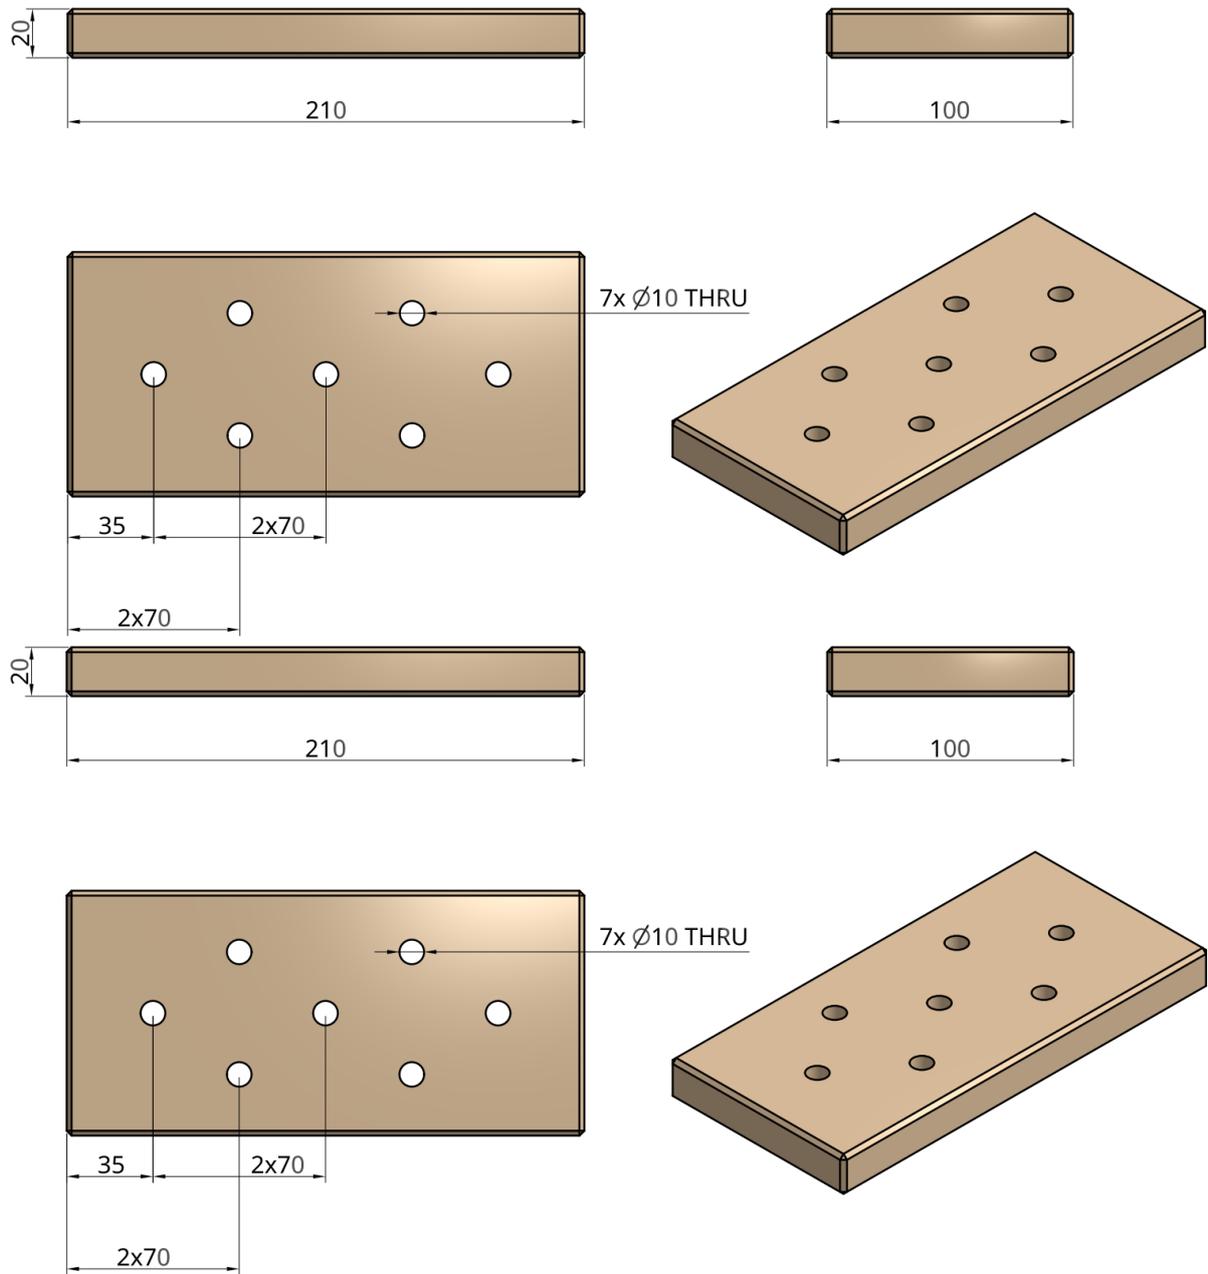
Bottom plate of the clamping block used to re-glue the syringes.
